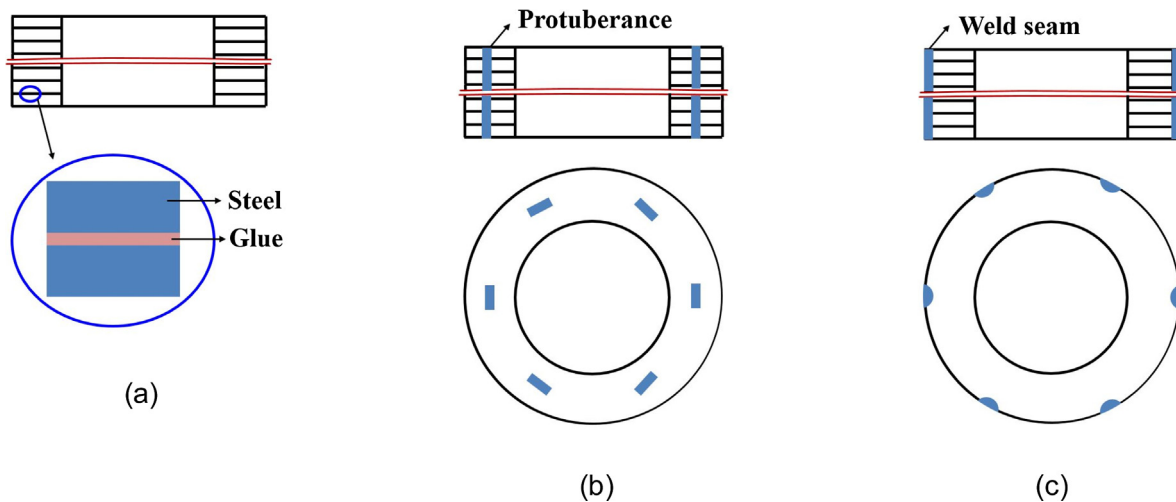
Schematic of the joint methods for laminated electrical steels: (a) glue joint; (b) mechanical joint; (c) welding.
